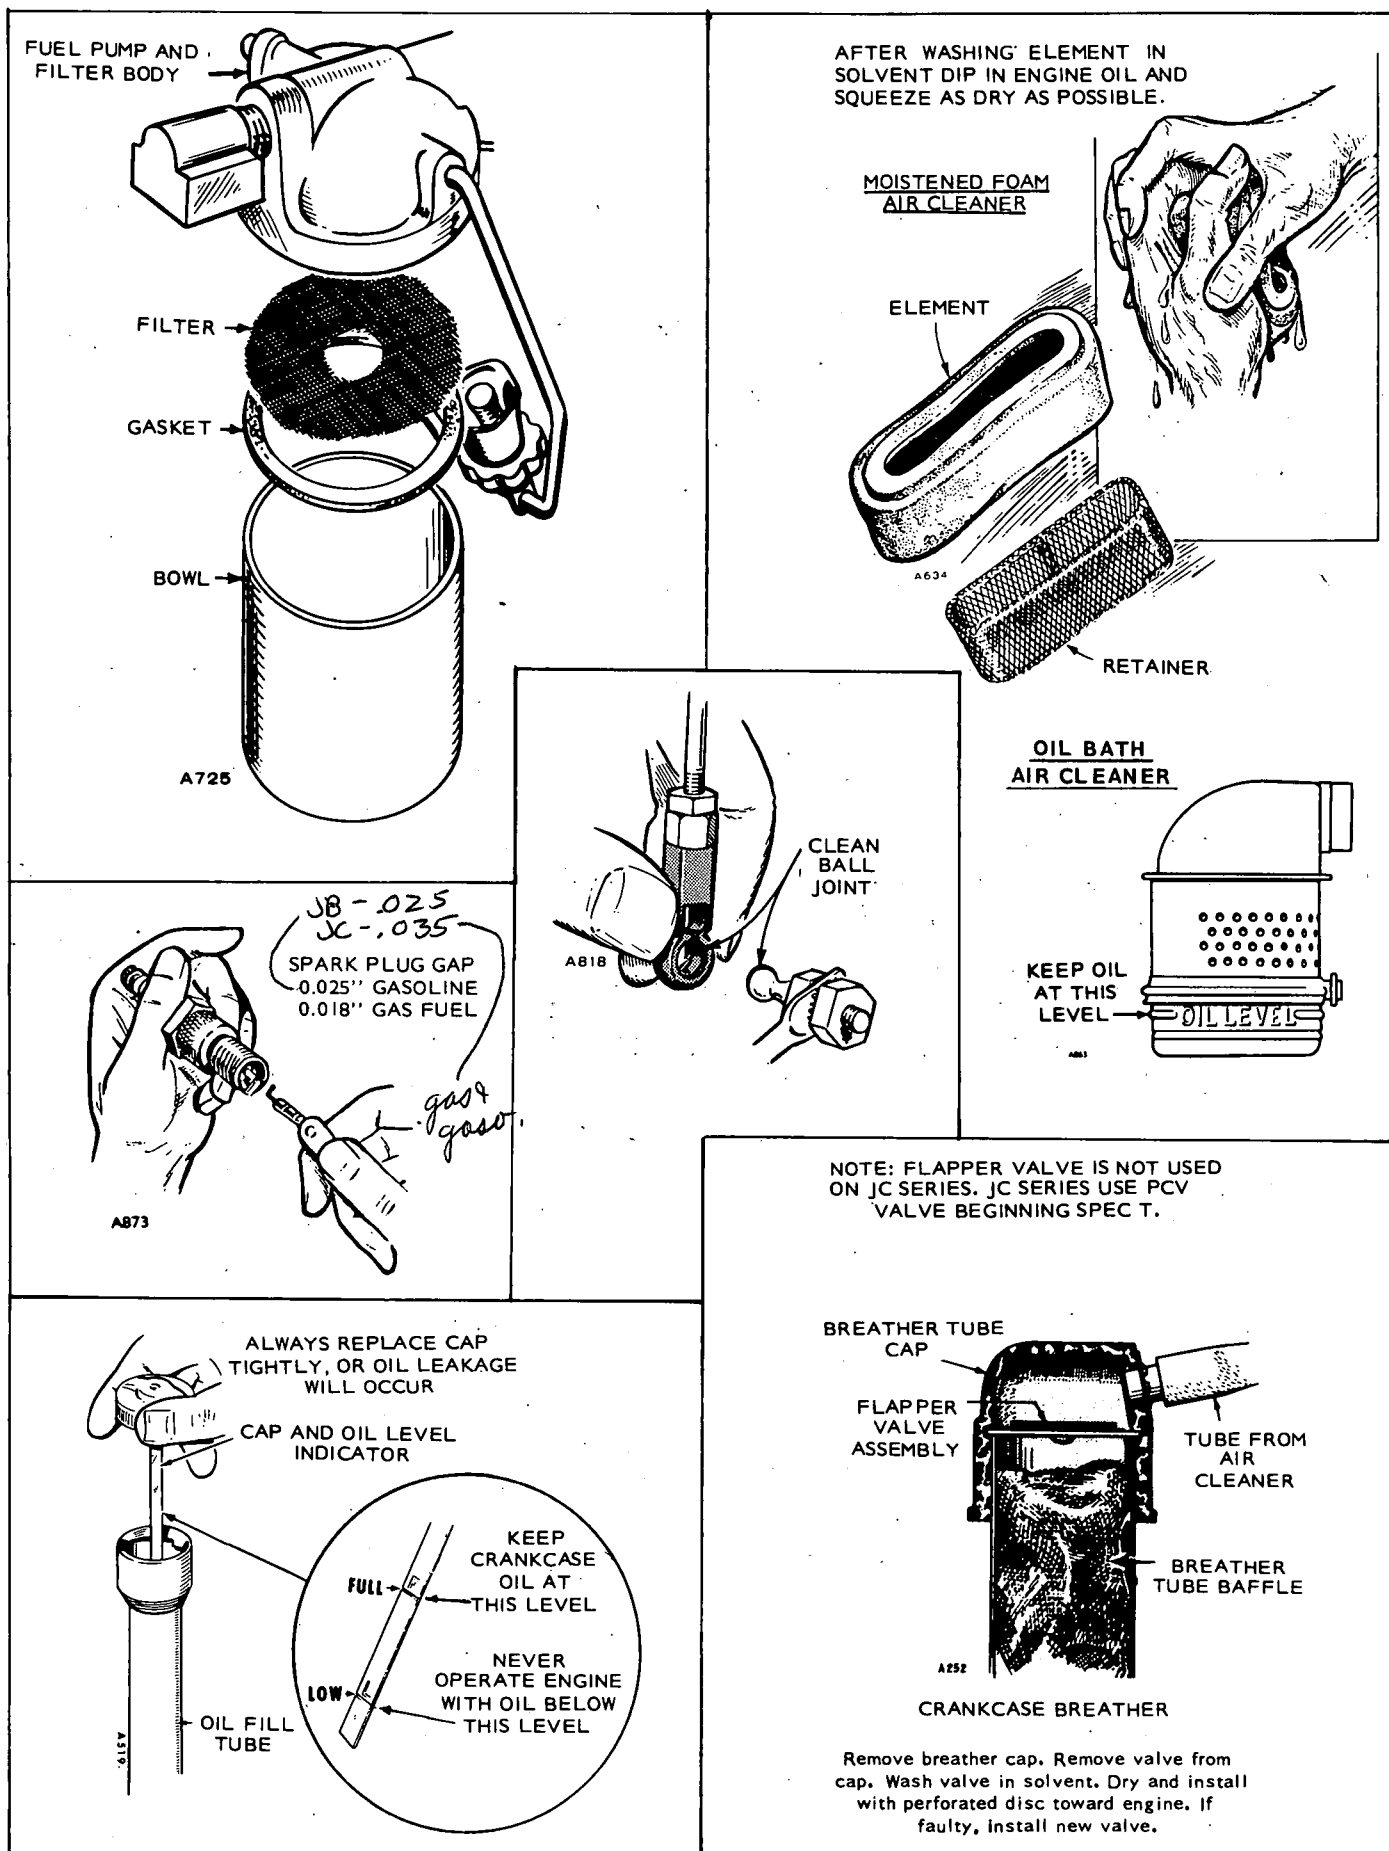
OIL LEVEL, GOVERNOR, AND CRANKCASE BREATHER MAINTENANCE
